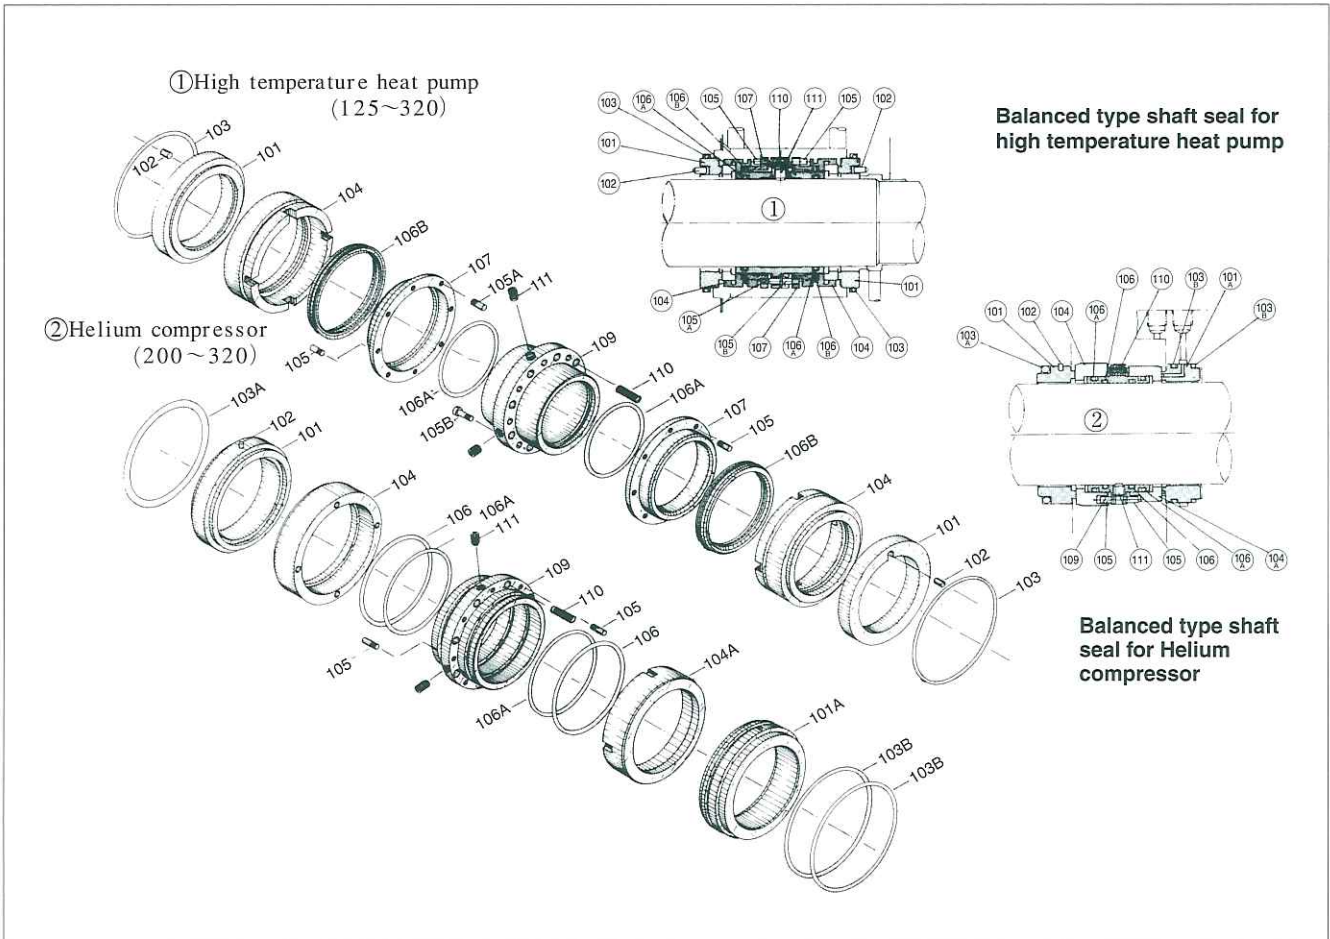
Mechanical Seal for Helium Compressor and Balanced Type Mechanical Seal
